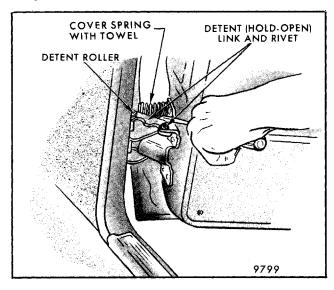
Front Door Hinge Hold-Open Spring Removal - X Styles
